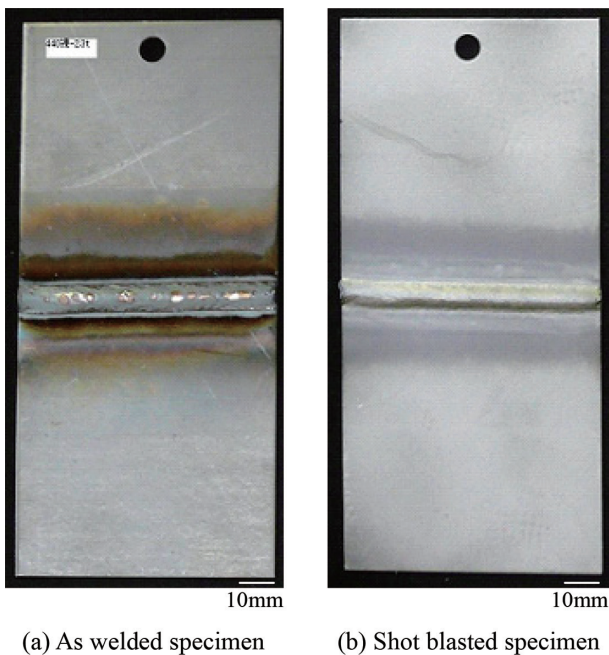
Surface of the arc welded specimens (440 MPa steel)
